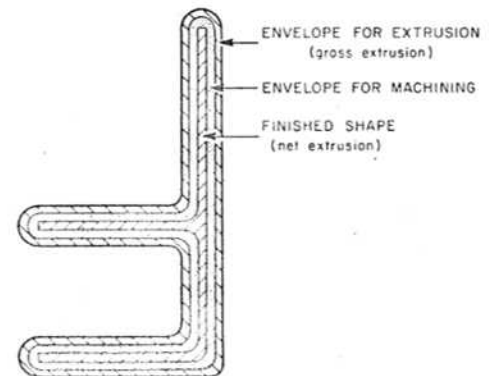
An example Ti alloy aerospace net extrusion cross-section illustrating the envelopes added to meet manufacturing, dimensional, and machining tolerances.
